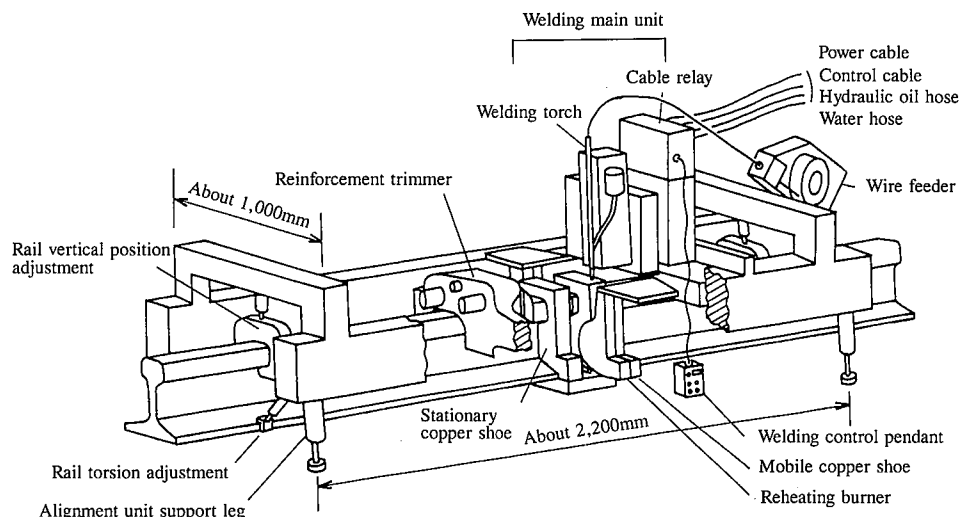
Concept of automatic fusion welding machine for rails
